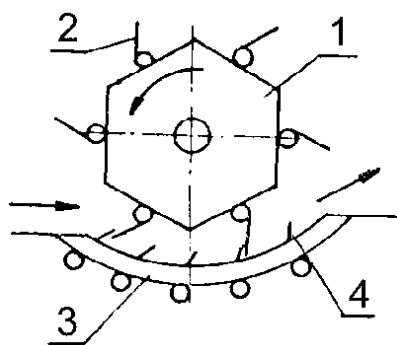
Adapted sloped conveyor of Z 056 cereal combine for initial threshing of bean. 1 – cross angle bar, 2 – lower housing of conveyor, 3 – flexible finger
